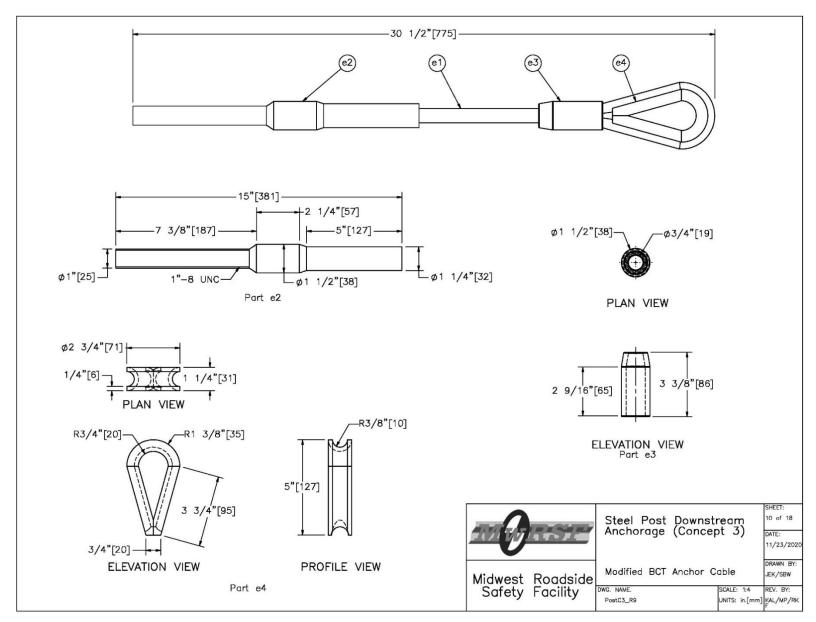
Modified BCT Anchor Cable, Test No. SPDA-3
